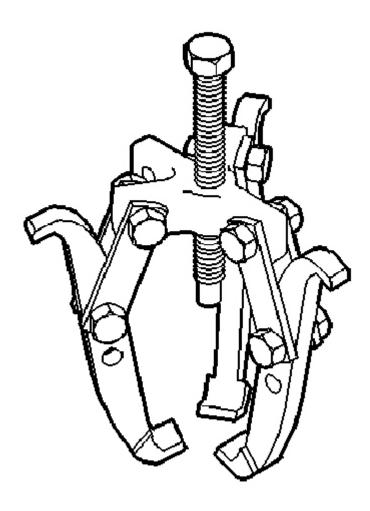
Puller 1023 Courtesy of CHRYSLER LLC
